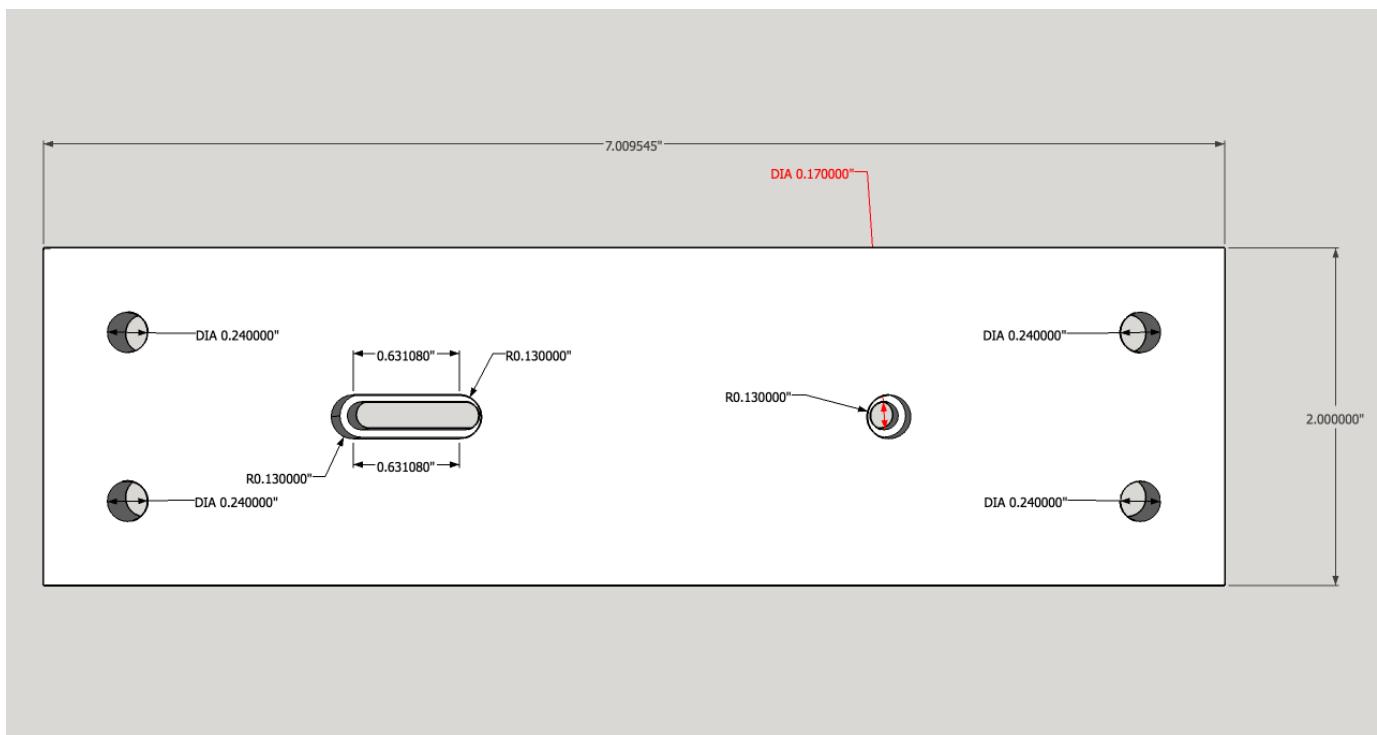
The bottom up view and measurements of the sFPI aluminum base
